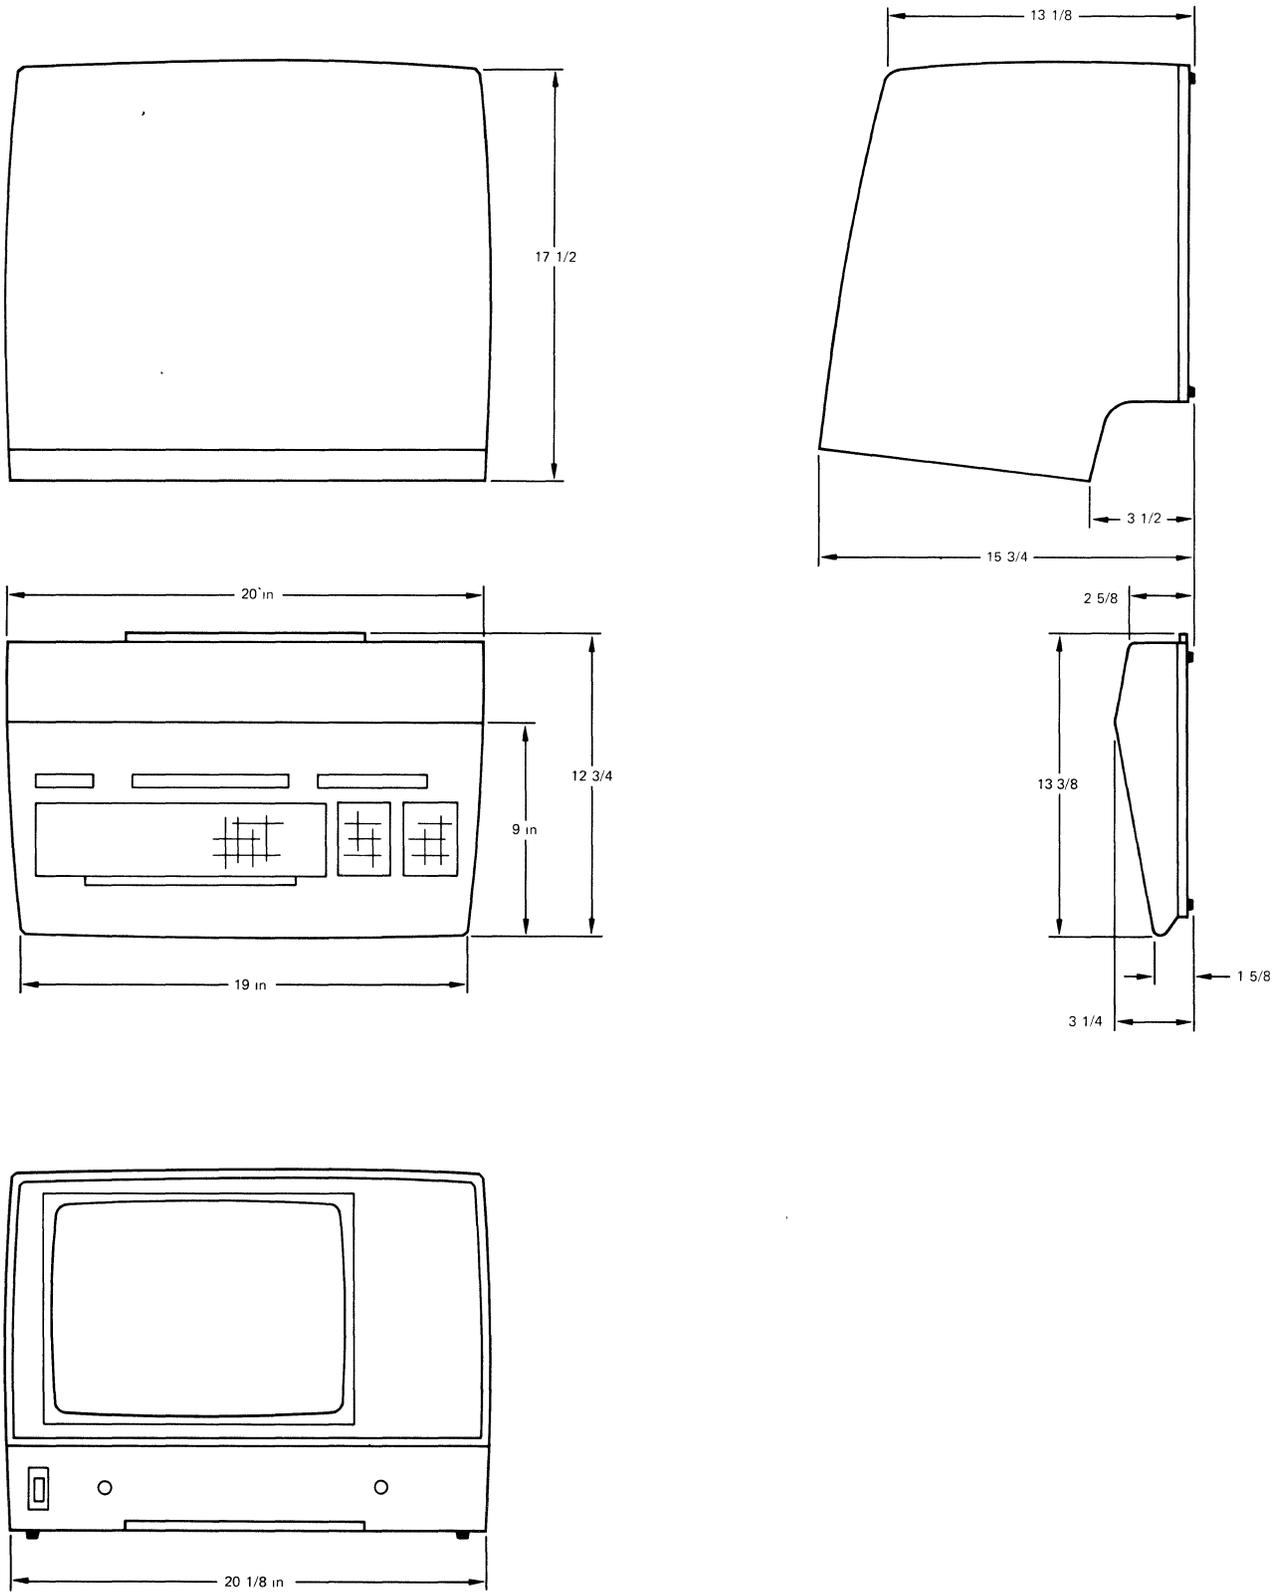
Mounting Dimensions of Display Console and Keyboard.
